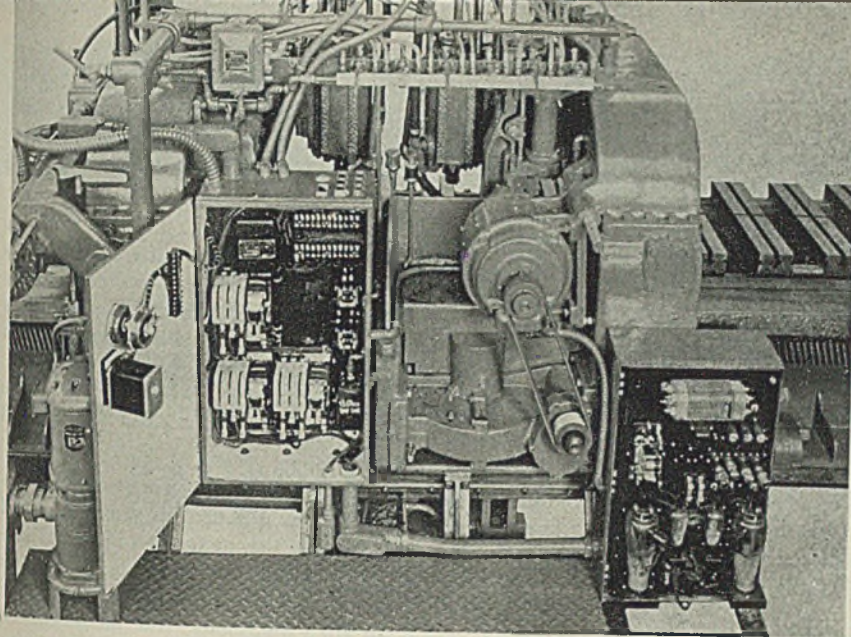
(Left)—Standard Thy-Mo-Trol panel (lower right) mounted on machine for milling airplane spars. Electronic control on this machine operates direct-current "feed" motor. Alternating-current control panel at left center handles other operations
